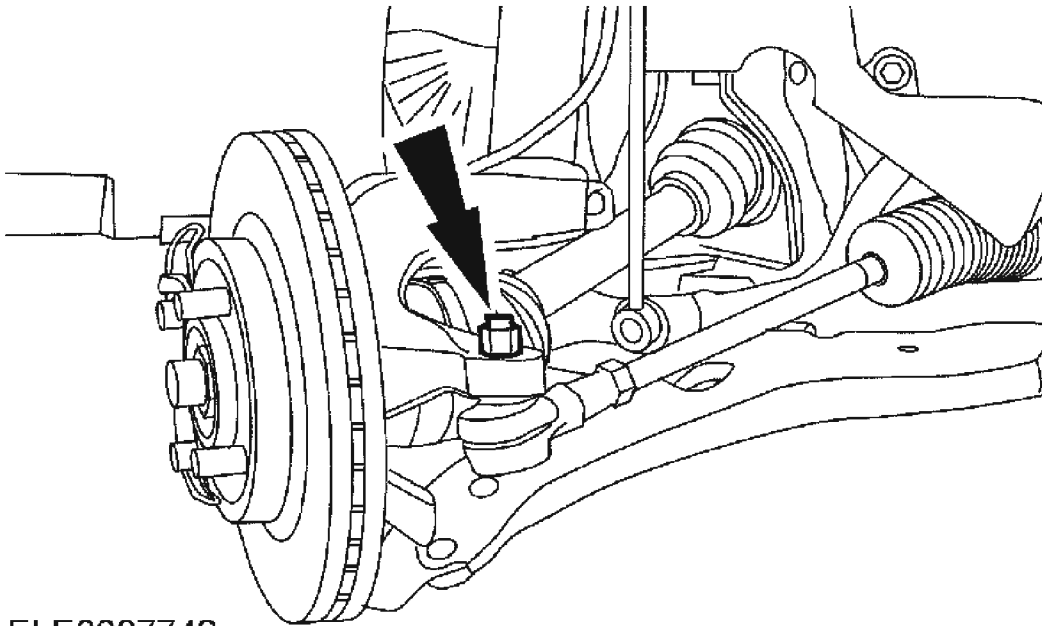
Disconnecting LH Stabilizer Bar At Strut
